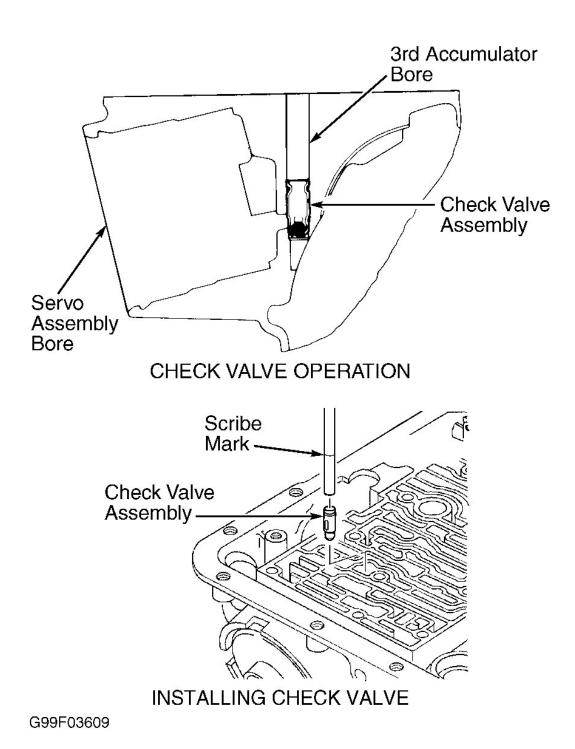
Installing 3rd Accumulator Retainer & Ball Assembly Courtesy of GENERAL MOTORS CORP.
